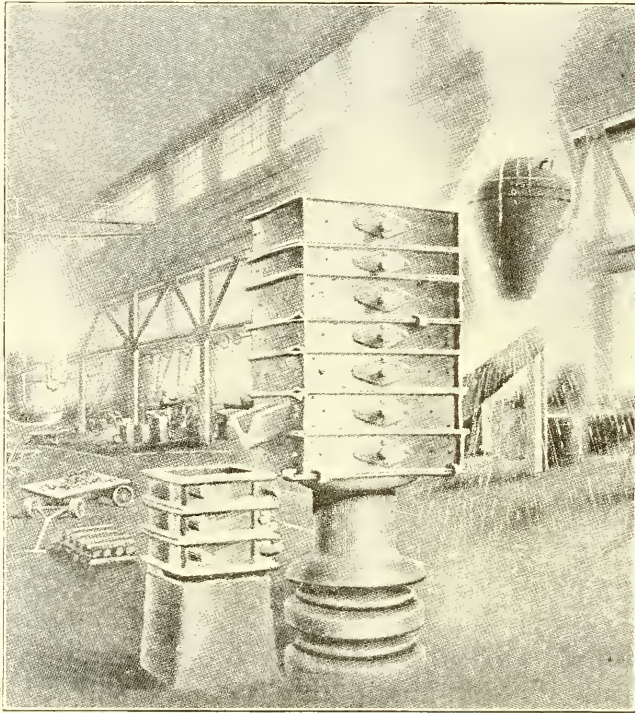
Welding a Roll Neck. Thermit Steel Tapped into Mold and Ladle of Steel at Left Ready for Final Operation.
